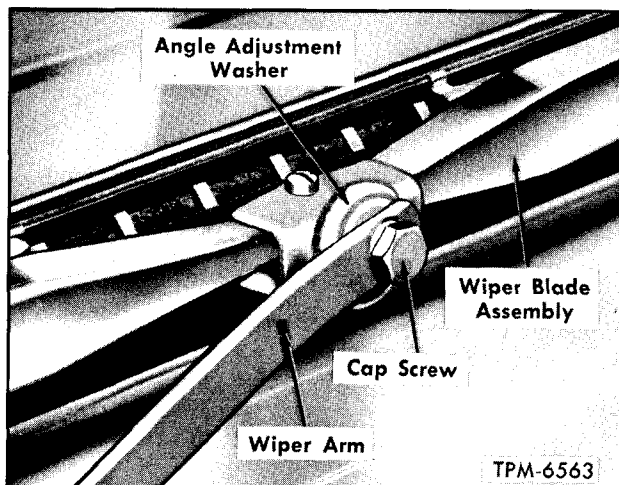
Blade Angle Adjustment (Steel Tilt Cab)
